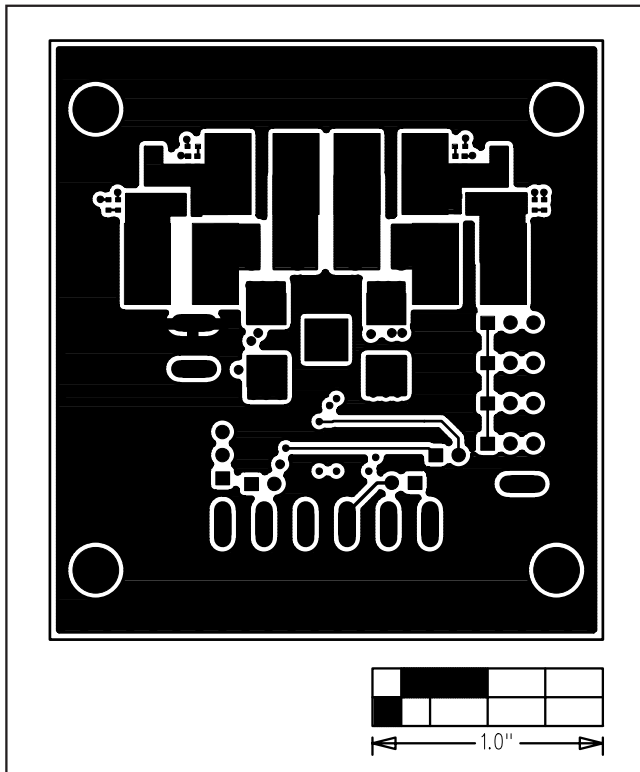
MAX9714 EV Kit PC Board Layout—Solder Side
